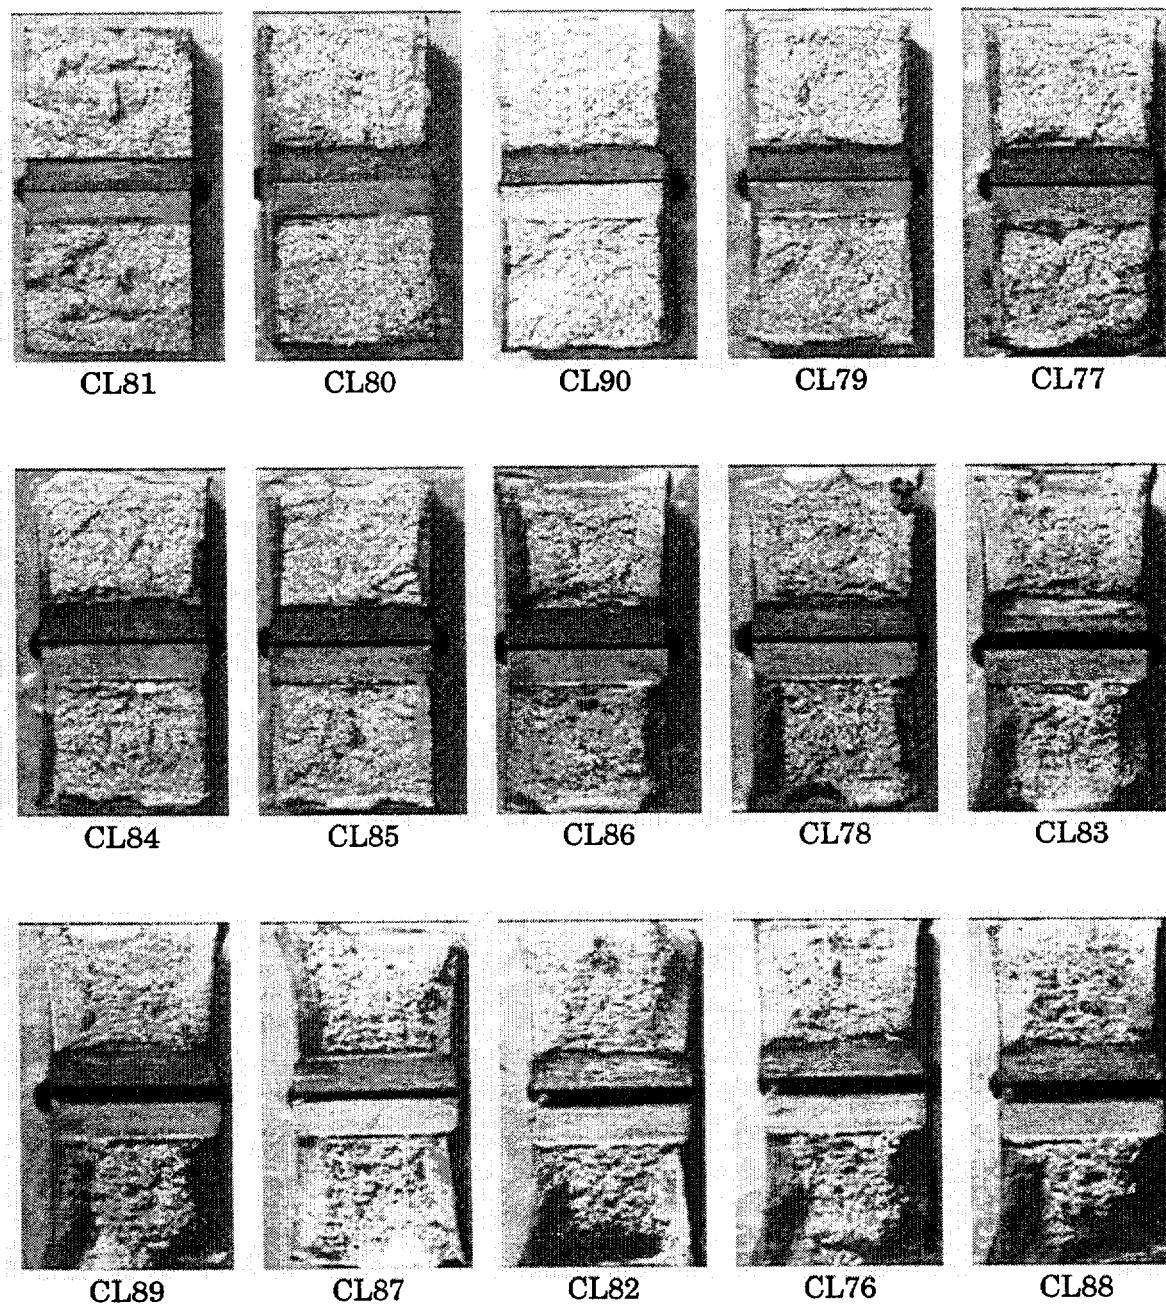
Charpy Impact Specimen Fracture Surfaces for J. M. Farley Unit 2 Reactor Vessel Intermediate Shell Plate B7212-1 (Longitudinal Orientation)
